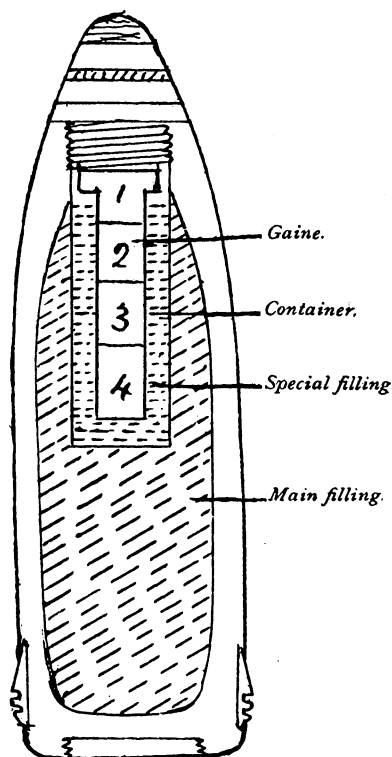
HIGH EXPLOSIVE SHELL WITH GAINE.
